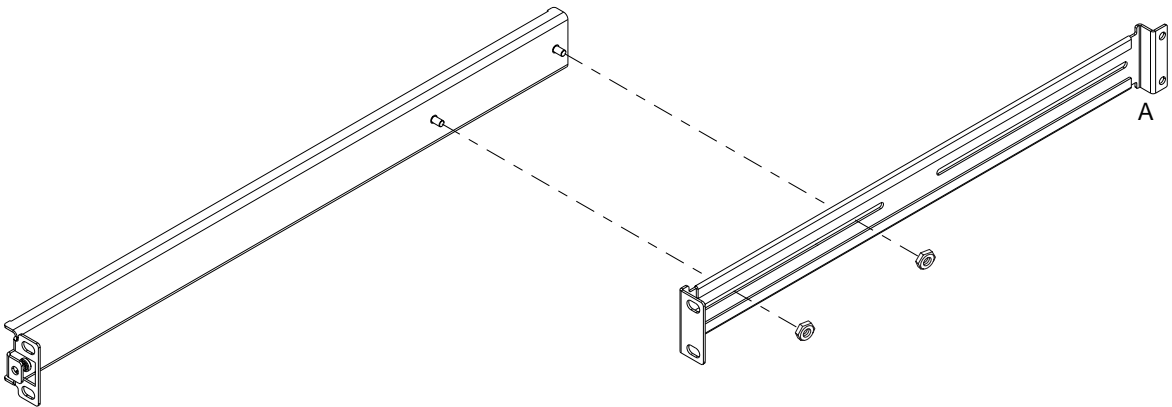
Slide Mounts for Sun 72-inch Expansion Rack
